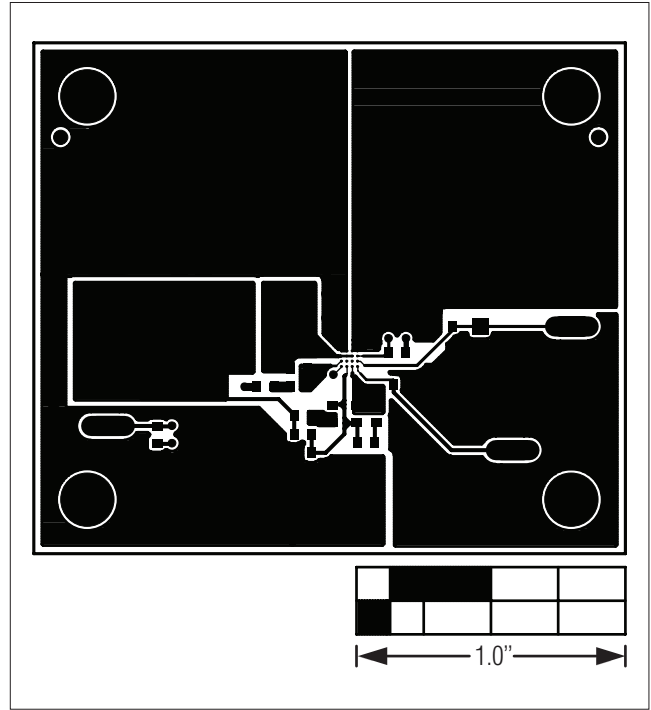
MAX15050 EV Kit Component PCB Layout—Component Side
